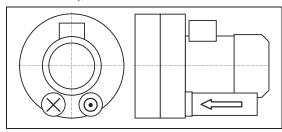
2BH1640 (two-impeller pump-motor unit with double-flow design)
